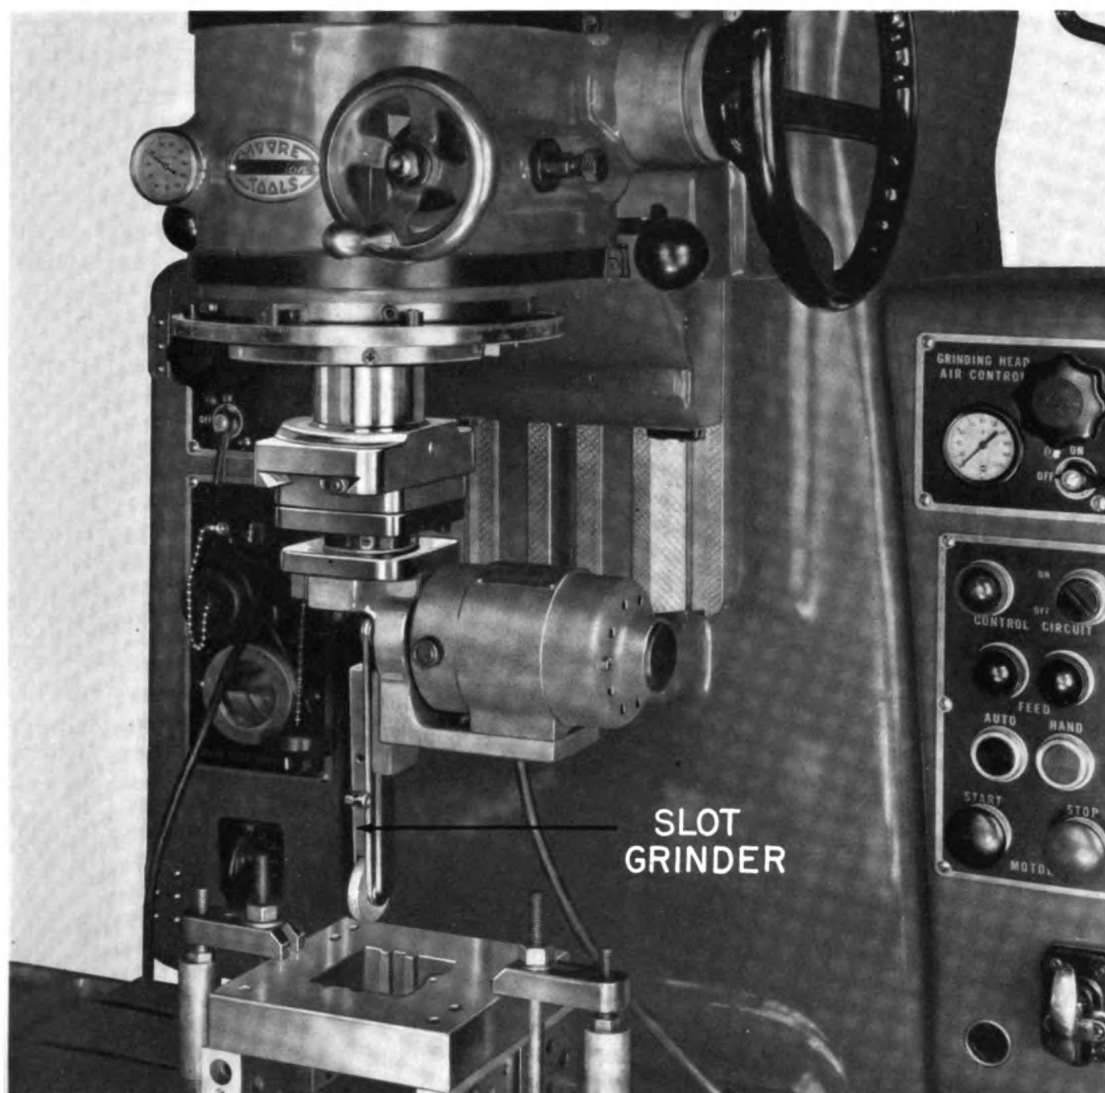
Typical contour grinding job with horizontal spindle "slot grinder" on No. 2 Moore Jig Grinder.
